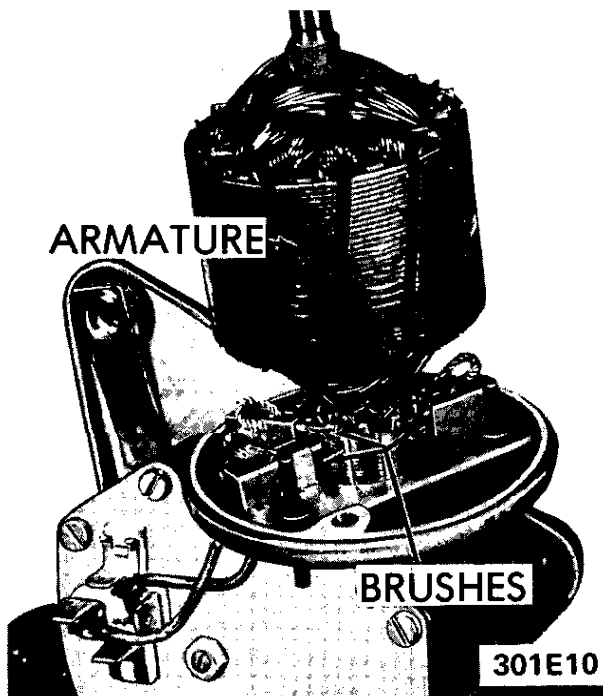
E-10 Transmission and Armature Removed from Motor Housing
